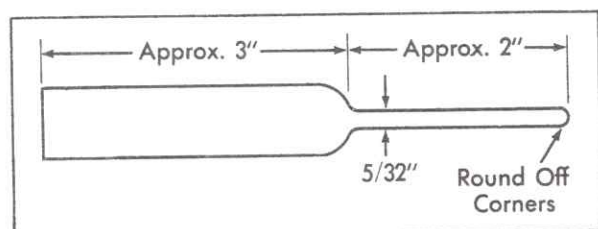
Rear Main Bearing Oil Seal Installer Tool
